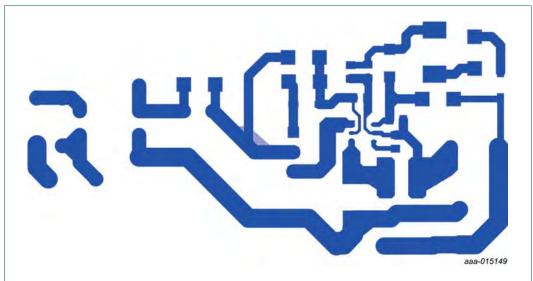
SSL5031BDB1207 demo board assembly, bottom view
